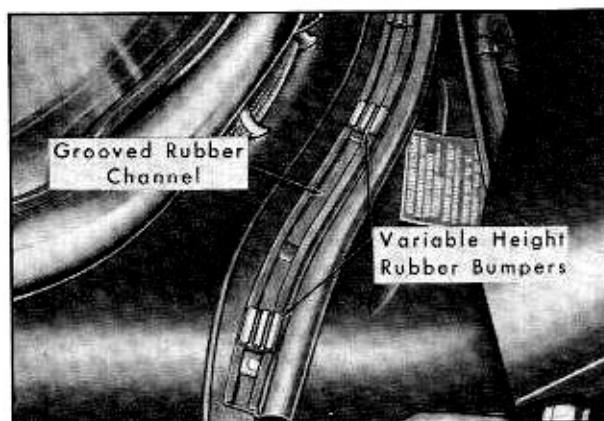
Adjusting Hood to Cowl with Rubber Bumpers
